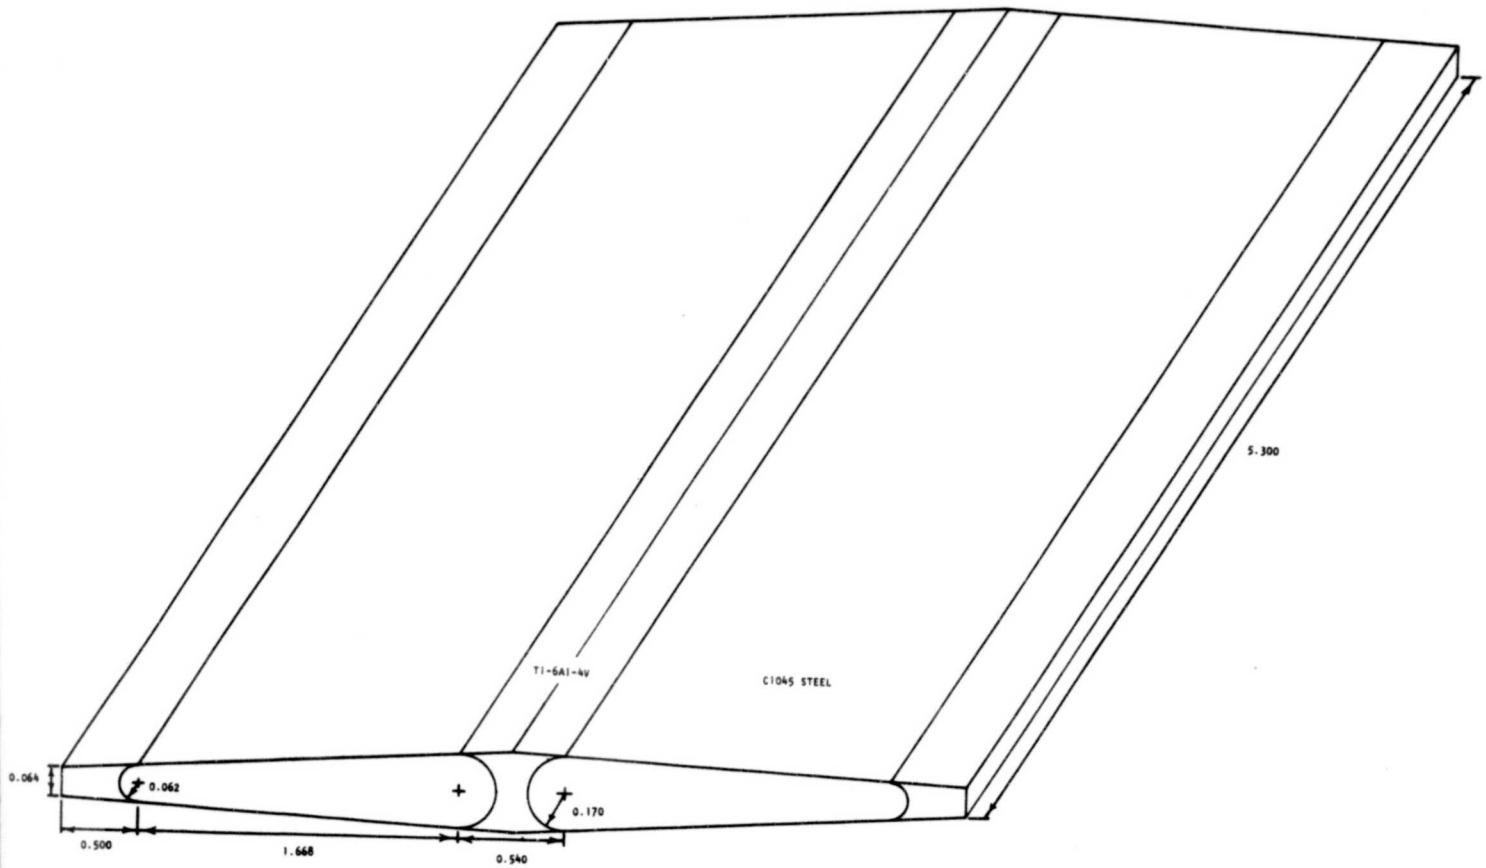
Steel-Titanium Fitted Insert Used in Specimen DS3.
